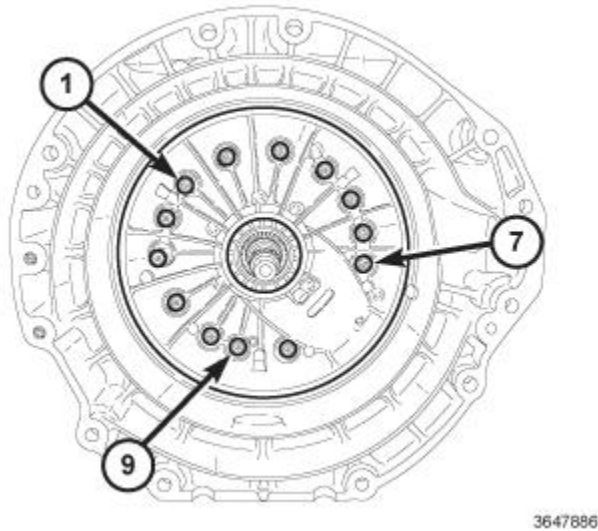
Pre Tighten Bolts One, Seven And Nine
